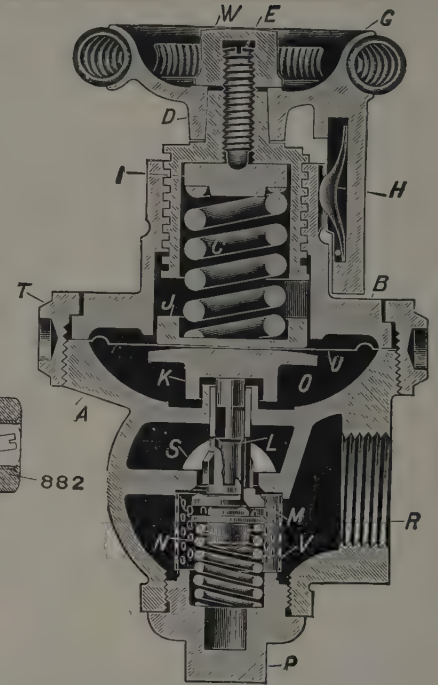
Gold Stop Valve Car Pressure Regulator, No. 737.
